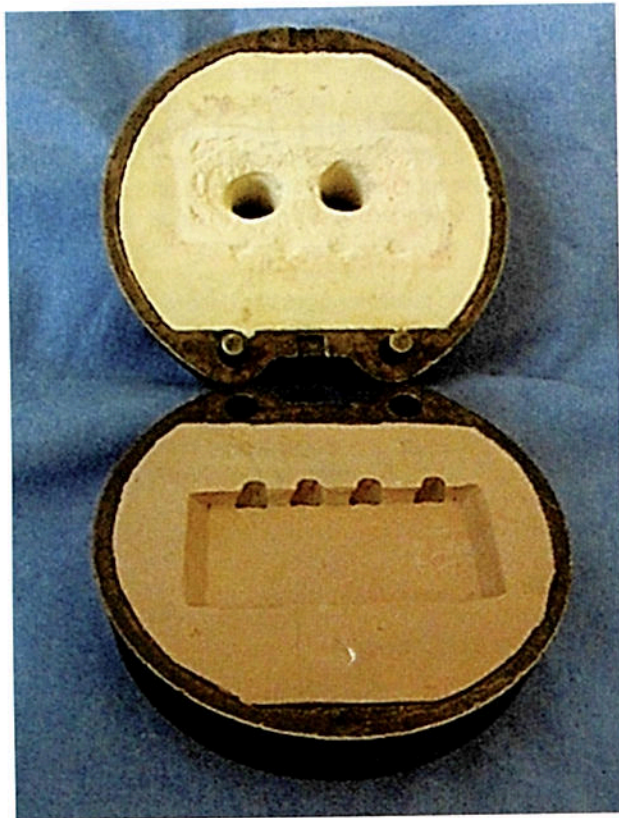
The rubber mould inside the brass flask: the cover of the mould displays the pour holes.
